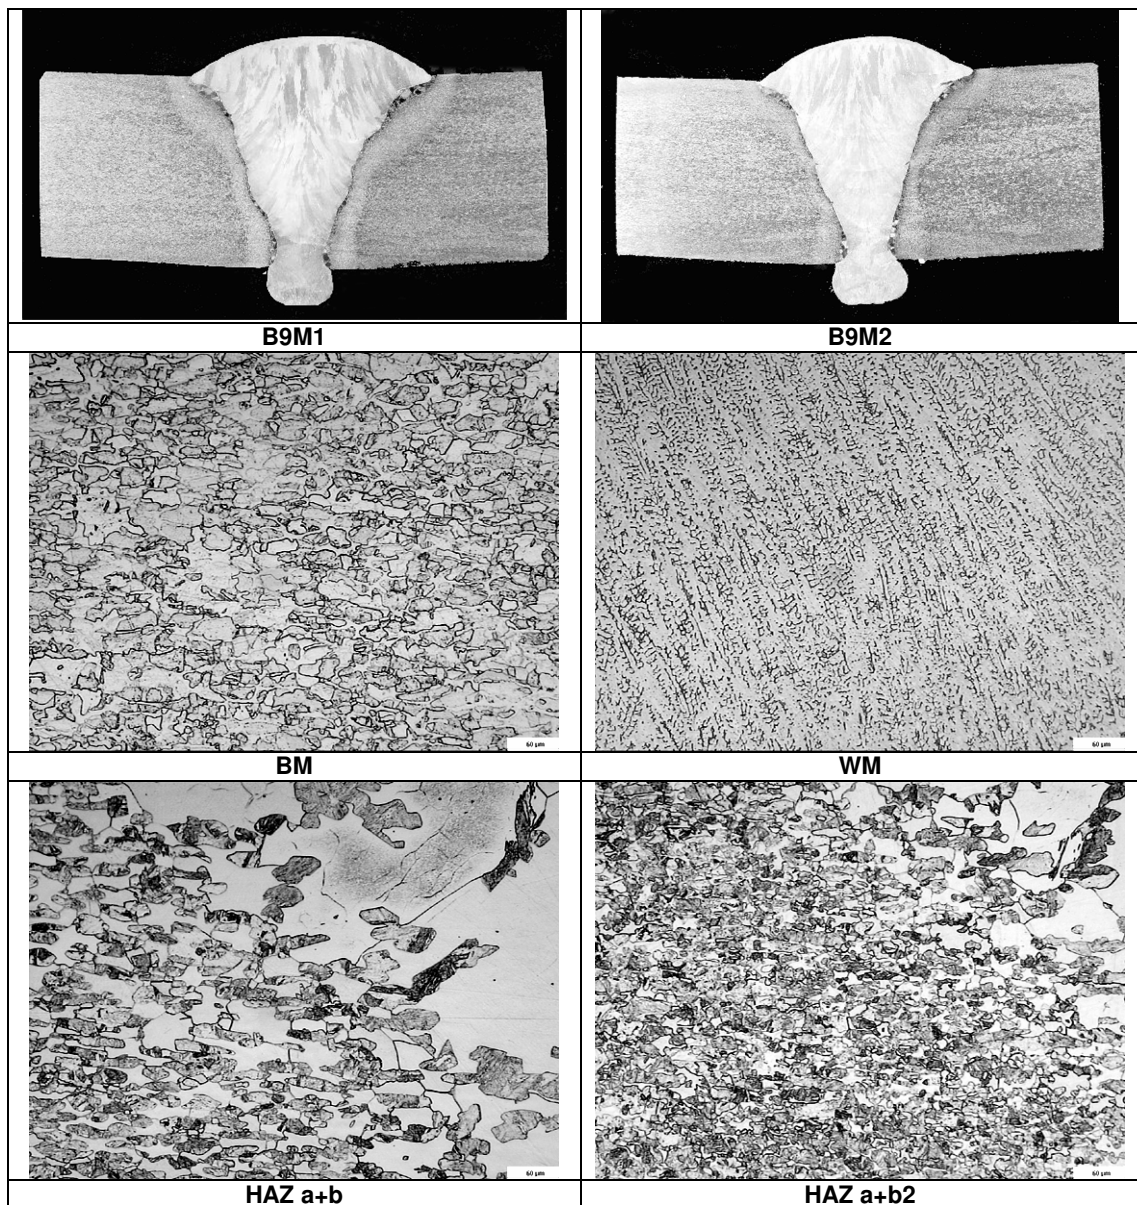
Macro and micrographs of 12 mm thick GMAW weld with 309 filler (B9).
